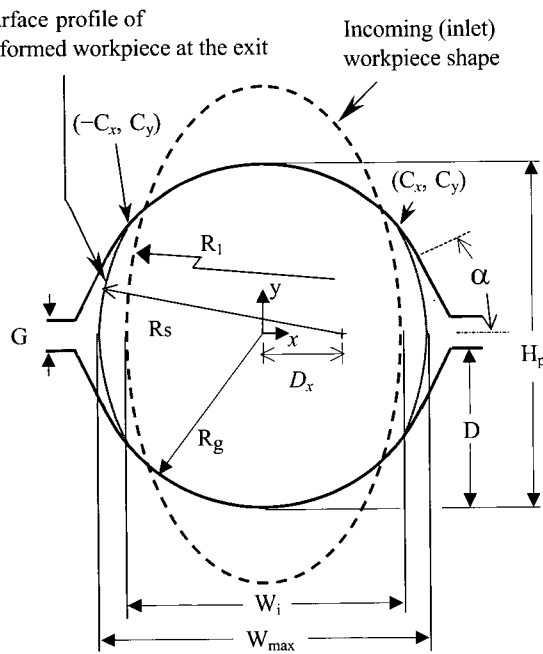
Geometrical designation of round roll groove and the radius of surface profile,  $R_s$ , of a workpiece for the oval-round pass rolling
